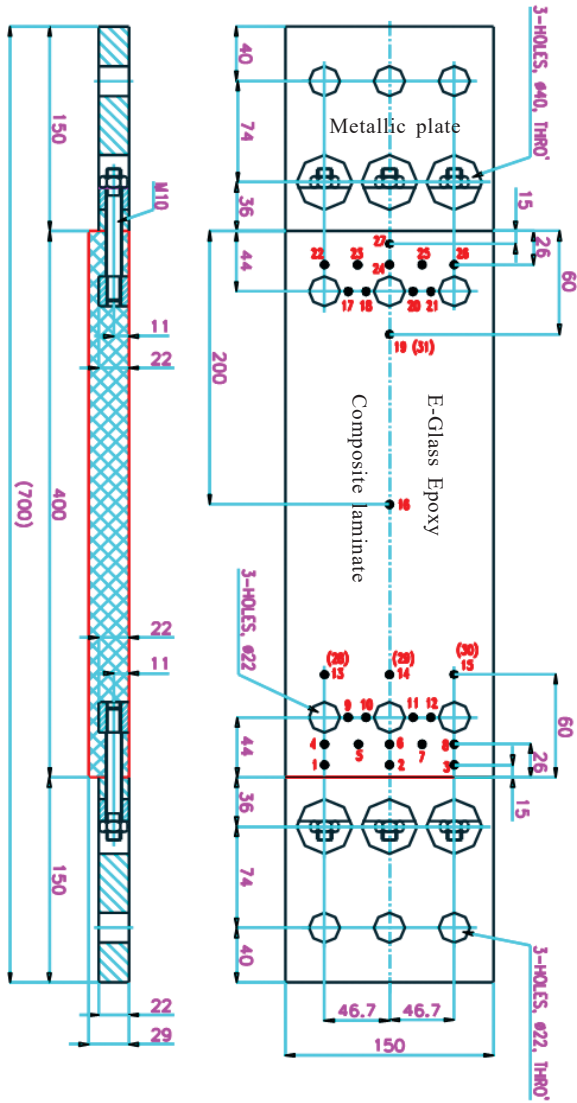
E-Glass epoxy steel axial bolted joint assembly.
